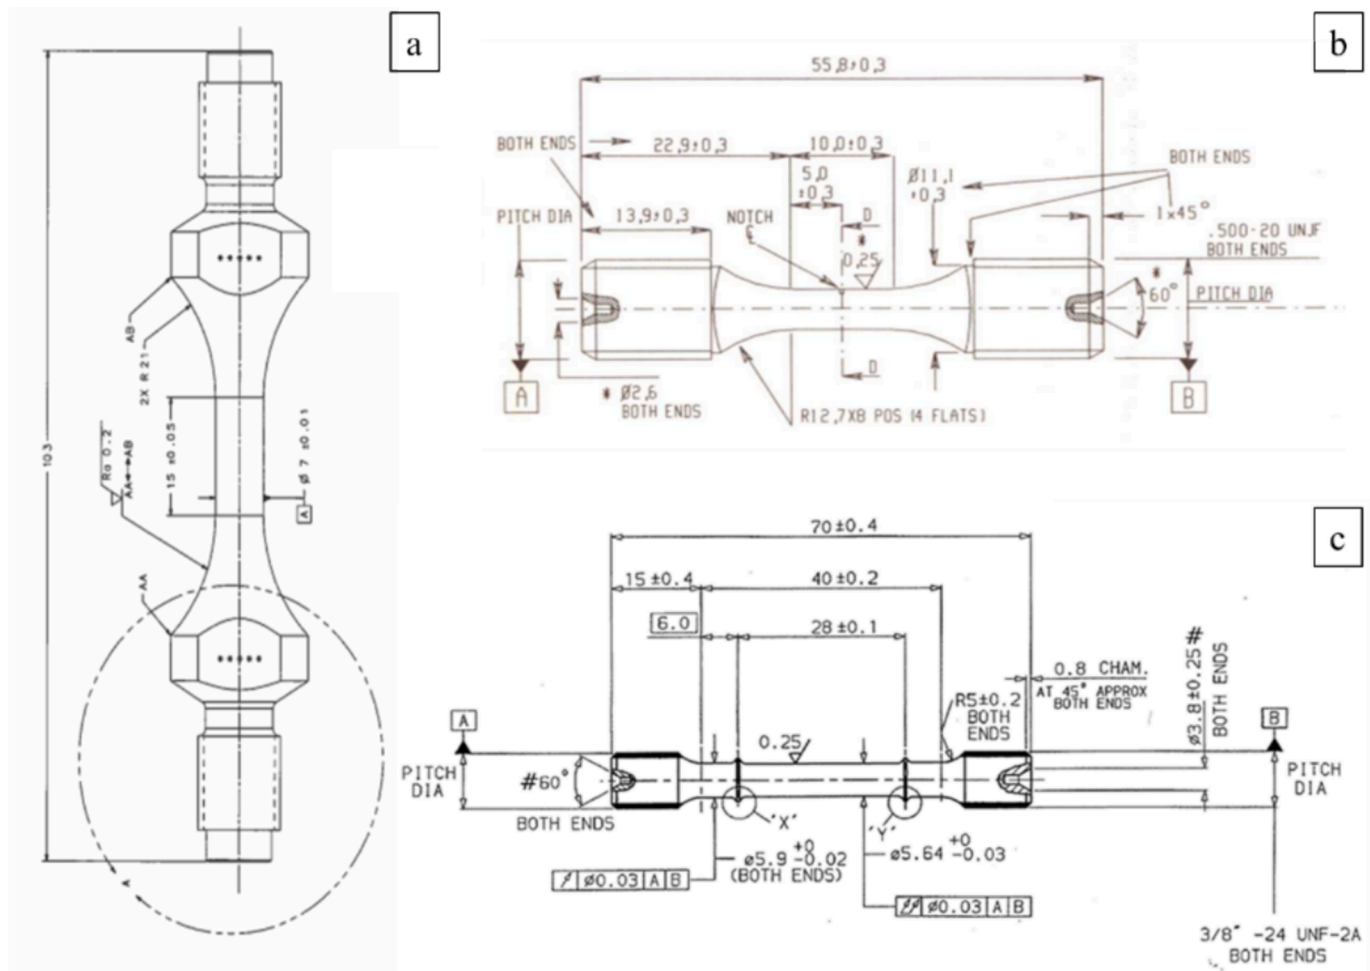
Dimensional specimen drawings for a) low cycle fatigue, b) fatigue crack propagation and c) uniaxial tensile testing.
